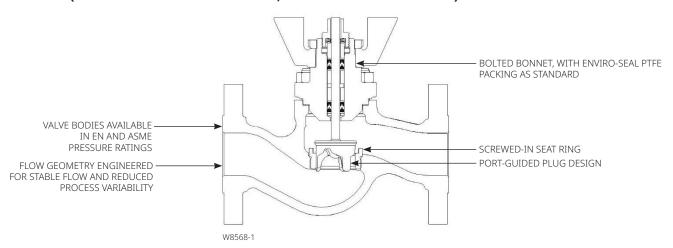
Fisher GX Bolted Bonnet Control Valve with Balanced Trim (DN 80 to 150 and NPS 3 to 6, Port Sizes of 70, 90 and 136 mm Only)
